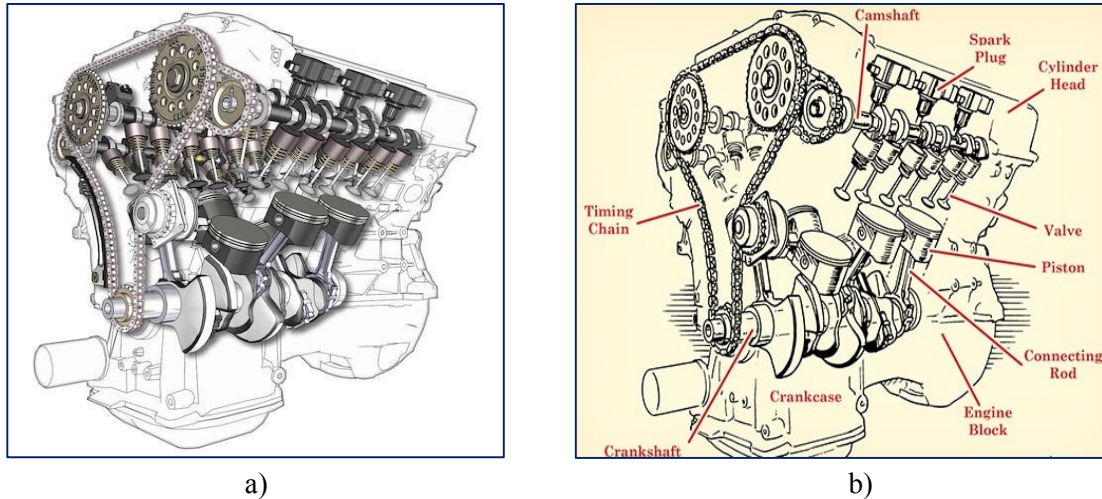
Internal combustion engine component: a) 3D model; b) sketch [126] [127]
